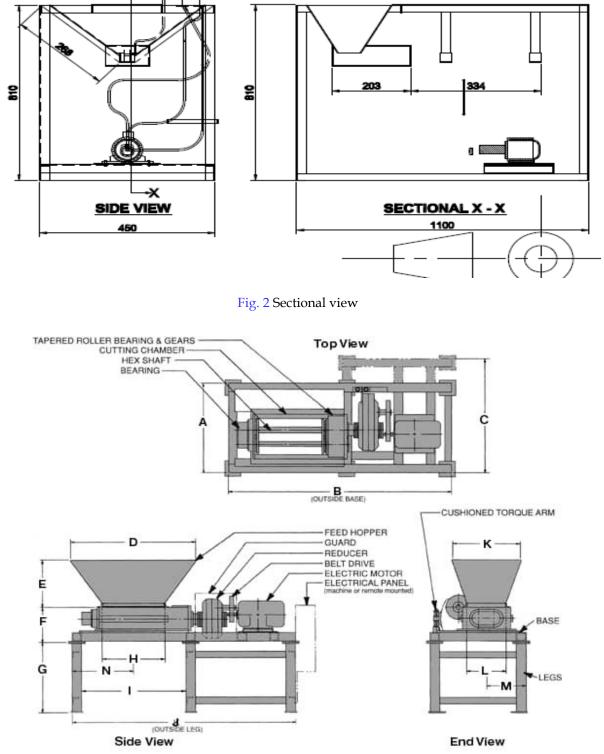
and Fig. 3 show the sectional views labeled descriptions of parts.
